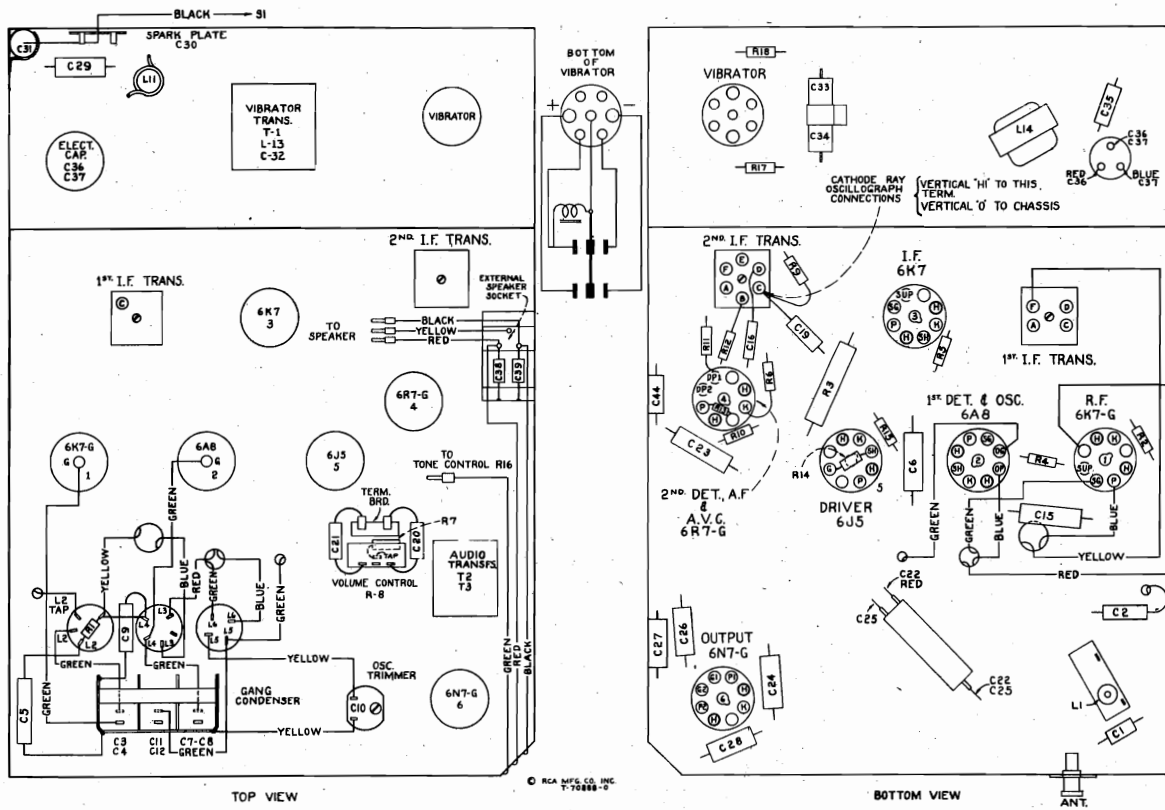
Component Parts Location and R-F Wiring Diagram (Model 8M3)
